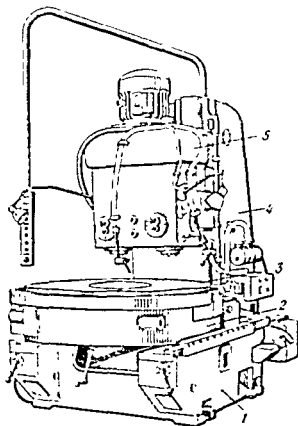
Two spindle vertical rotary-table milling machine, model 6A23
